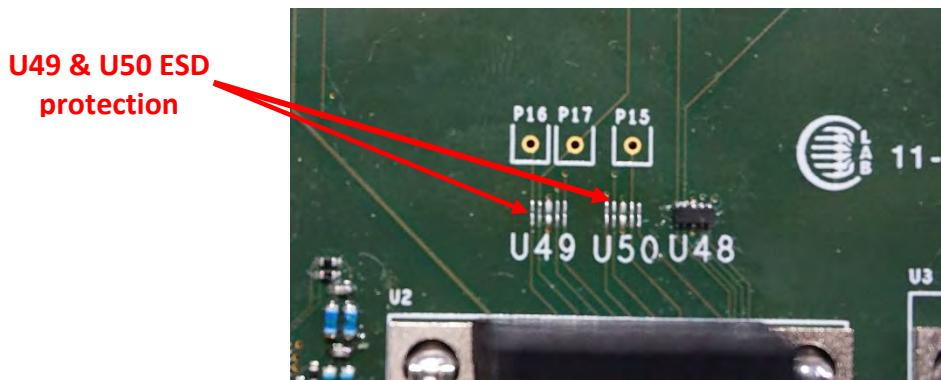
Removed U49 & U50 ESD RCLAMP components.
